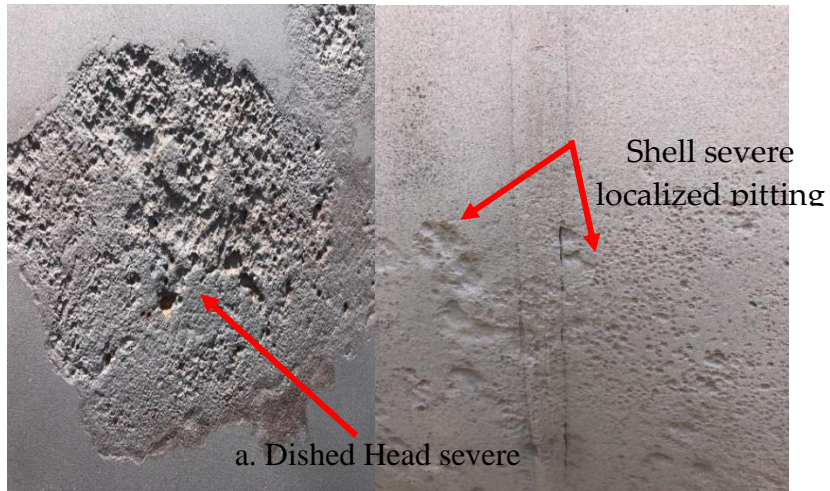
Severe deeply localized pitting corrosion at dished head and shell
